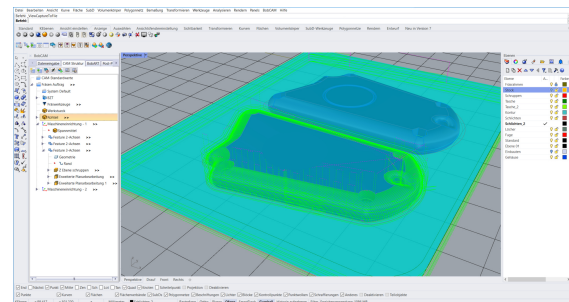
Calculated toolpaths in BobCAM for machine production of the components.
